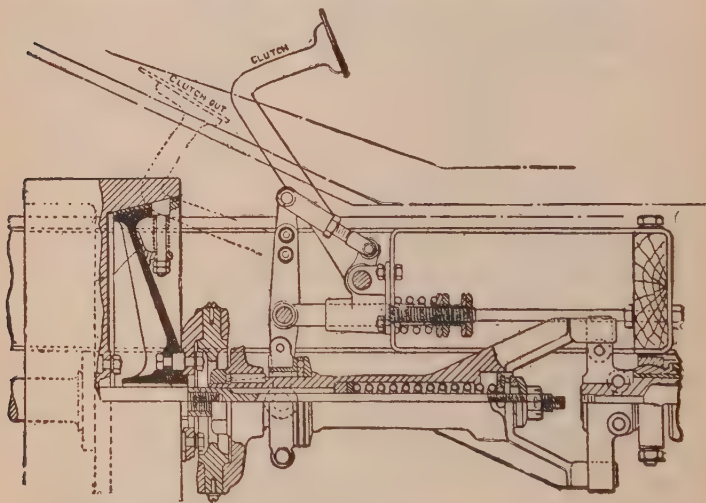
Showing method of mounting a cone clutch. The dotted outline of clutch pedal shows position for releasing the clutch.
